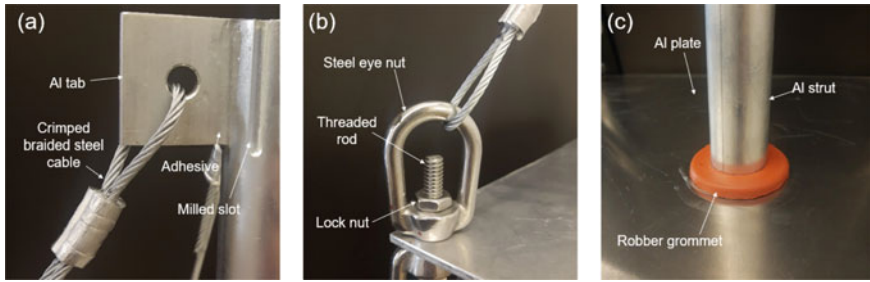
a Strut end with milled out slots, adhesively connected wing, and crimped cable b threaded rod and eye nut assembly at the corners of the plate c rubber grommet between the strut and plate
